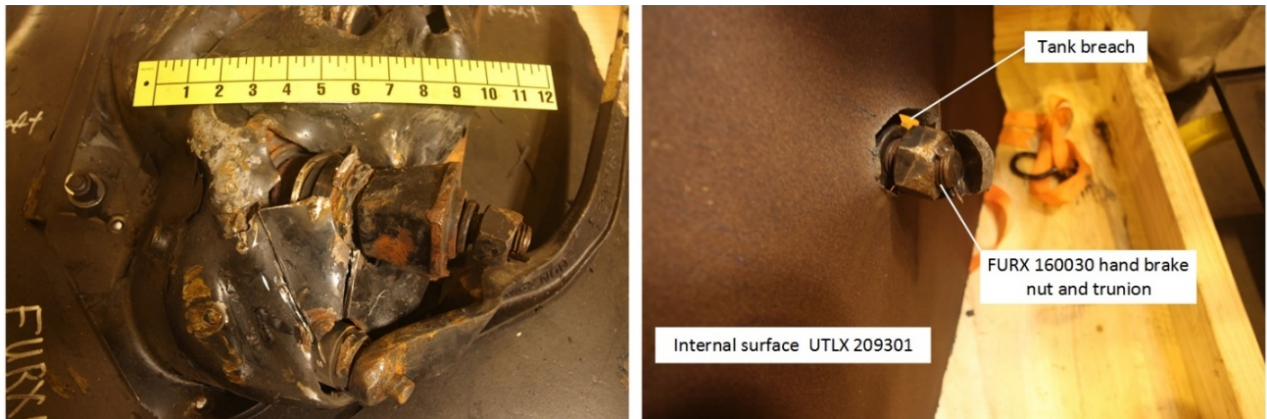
FURX 160030 brake wheel assembly (left). UTLX 209301 punctured tank shell coupon with nut and trunion inserted for fit test (right).
